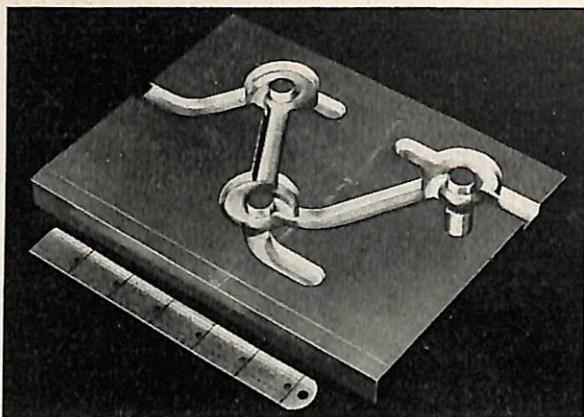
A Light-alloy Wave-guide Component that was produced in Six Minutes on the Tape-controlled Milling Machine
